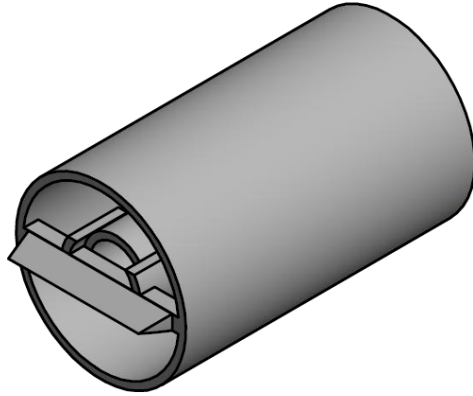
Isometric view of the housing assembly. The diffuser is angled at 15 degrees and the primary coil is chamfered to reduce the flow obstruction.
